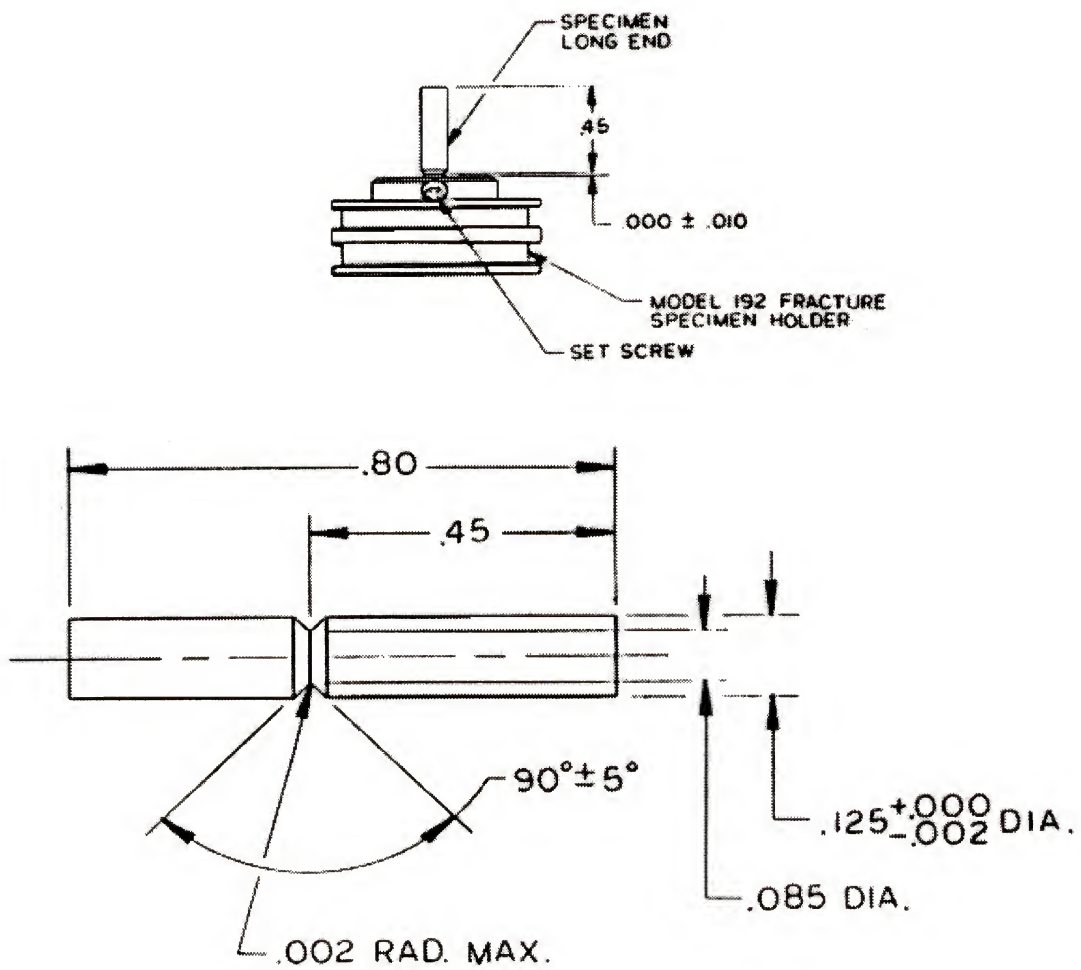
Sample fracture stage and dimensions for AES in-situ fracture experiment.
